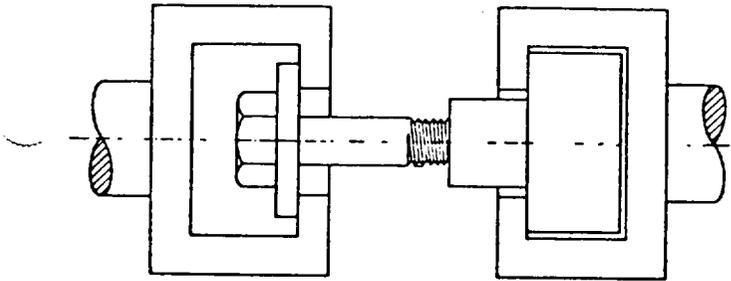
TENSILE TESTING OF FULL SIZE BOLT OR SCREW
